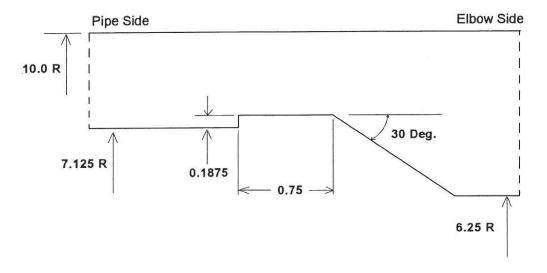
Geometric sketch of the "repaired" pipe to elbow girth butt weld junction.
